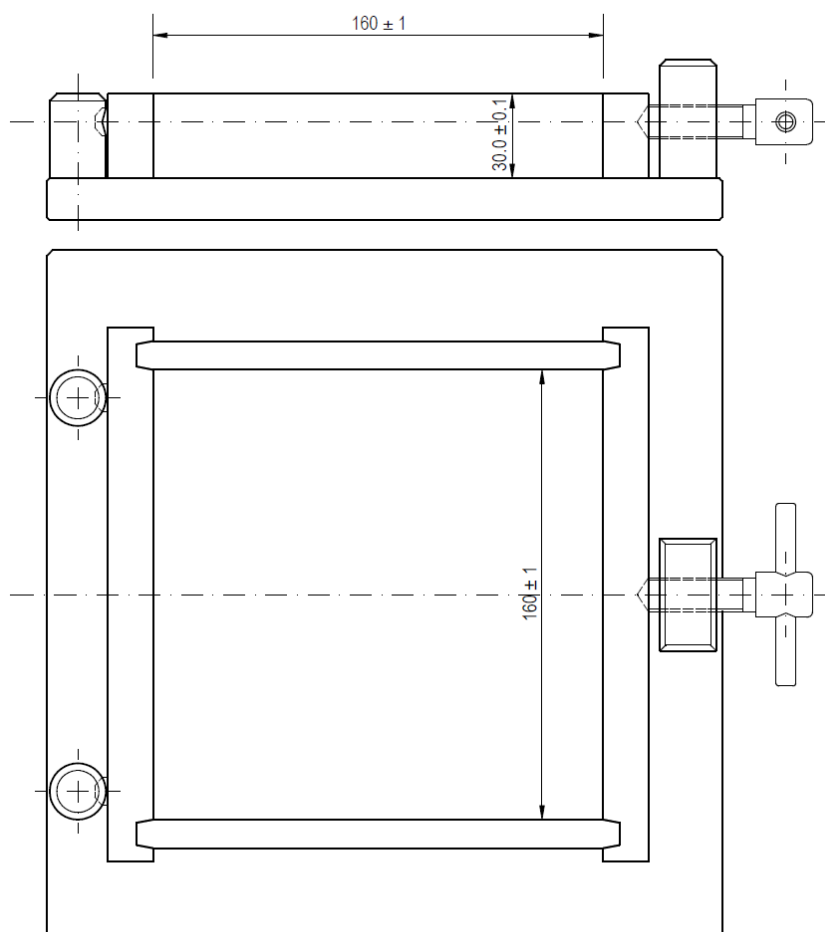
Image of the mould and loading hopper with dimension and tolerances
